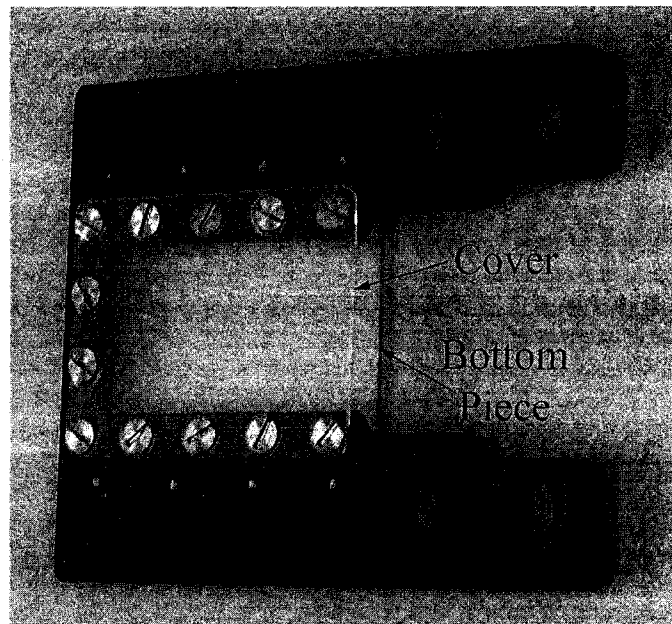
Chip holder (2.4" × 2.1") with cover and bottom piece.
